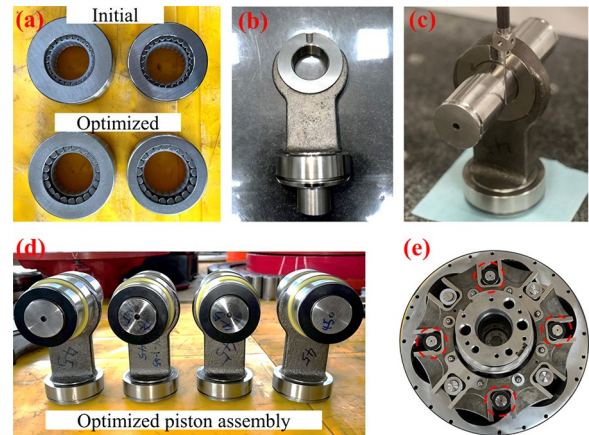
Material preparation for the experiment: (a) Initial and optimized cam roller and guide roller, (b) Piston, (c) Piston and piston pin, (d) Optimized piston assembly, (e) Hydraulic motor
